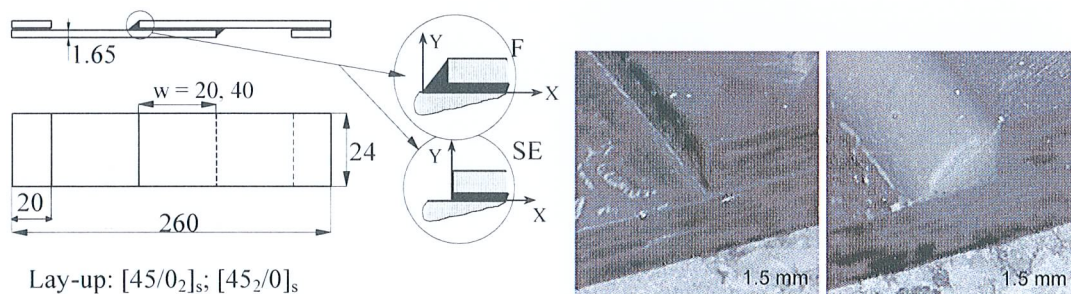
Geometry of the single lap bonded joint ($w = 20$ and 40 mm) and details of the corner geometry SE = Square Edge joint; F = Fillet joint.
